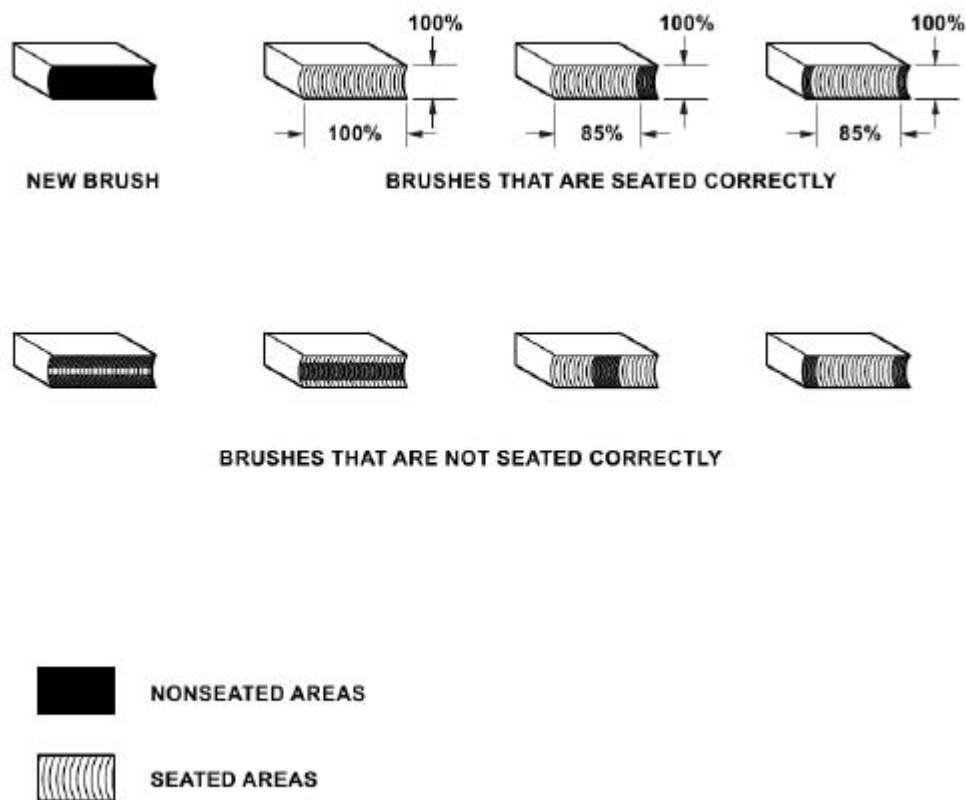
Seating of the Starter Generator Brushes – Inspection
